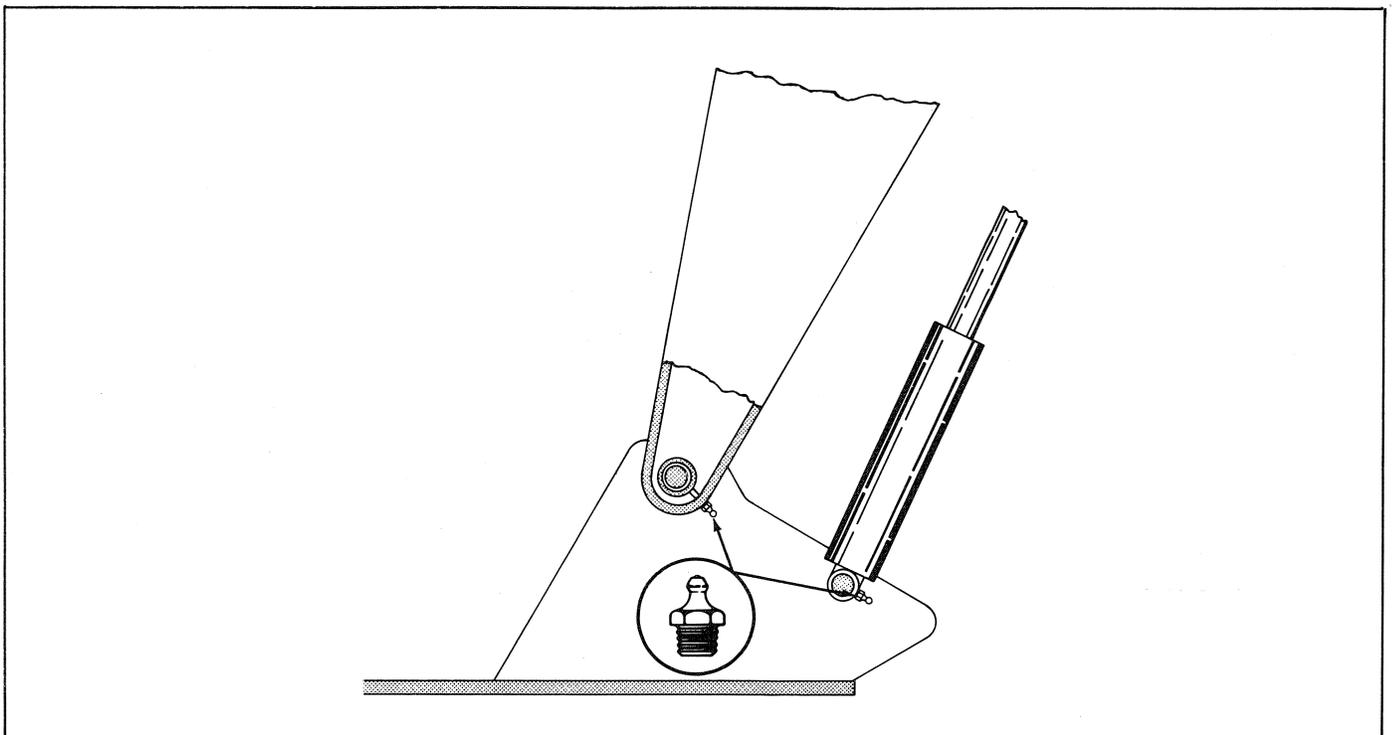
Grease Fittings on Base End of Hoist Cylinder and Main Boom to Mast Hinge Pin.
